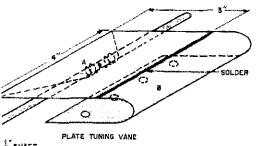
The plate-tuning vane is assembled by soldering a piece of thin flexible metal to a piece of brass stock. The thin material provides a good rf path to the chassis. Note that the fishing line is wound in or let out by both ends of the shaft simultaneously, thus pulling on both corners of the vane at the same time.
